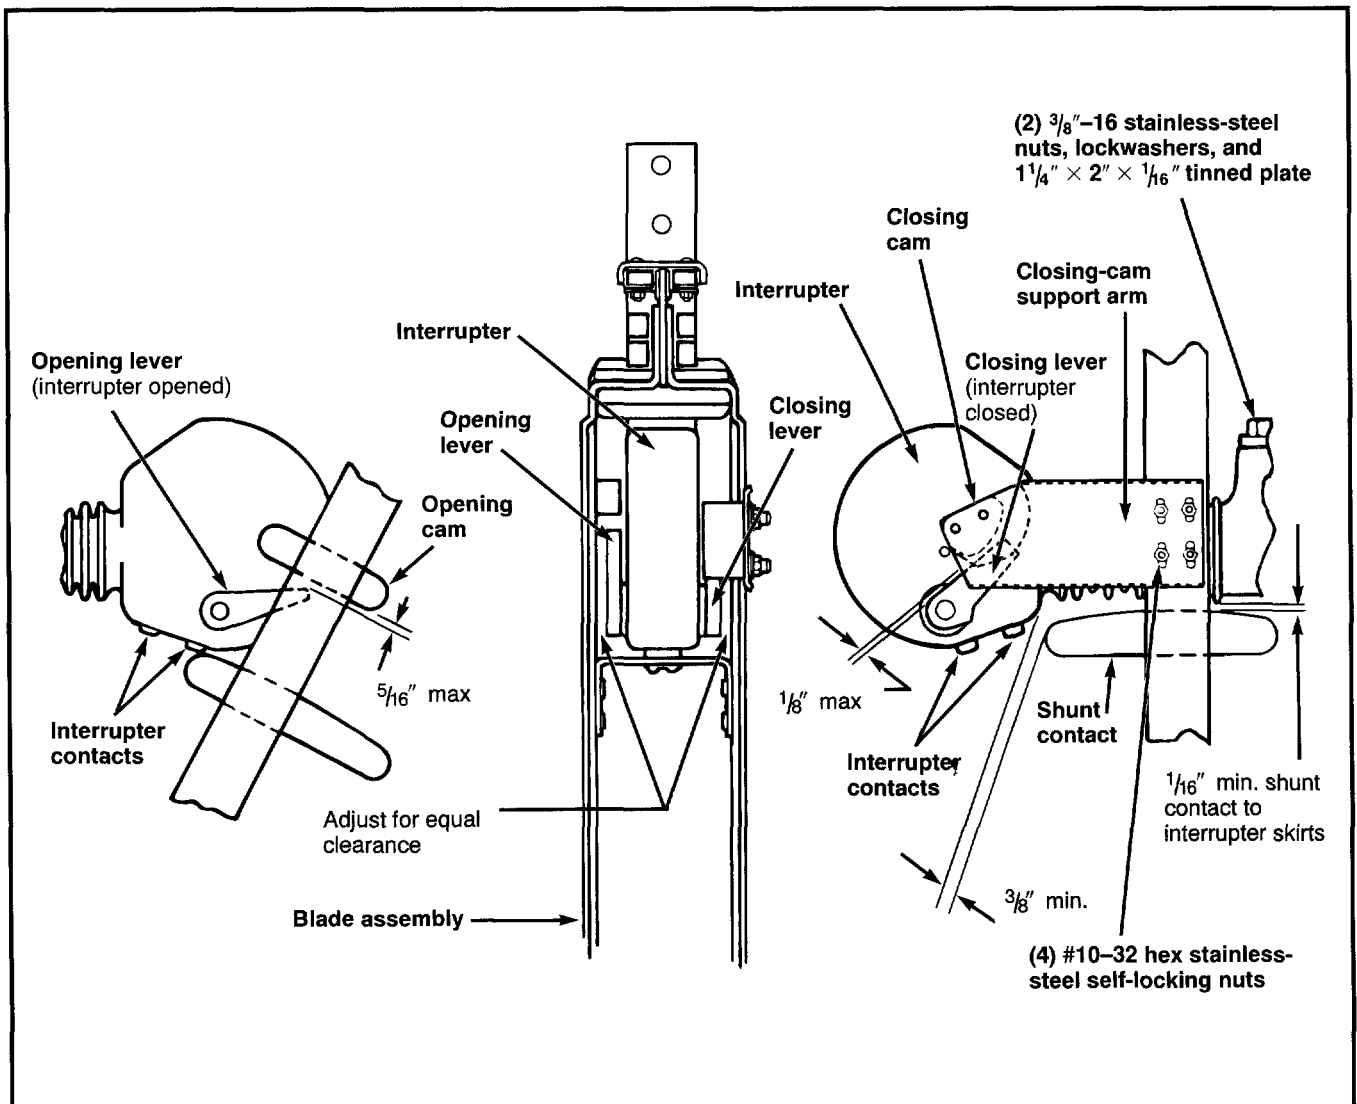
Operation checkpoints for interrupter-to-blade alignment on Three-Pole Vertical-Break Style Alduti-Rupter Switches rated 25/34.5 kv and 34.5 kv, 600 amperes and 1200 amperes.
